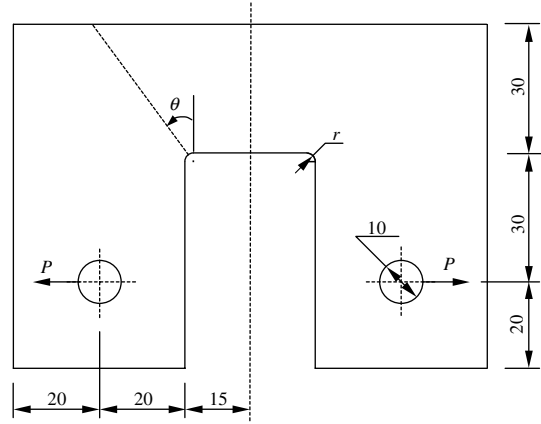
Dimensions (mm) and loading of the channel-section specimen (10 mm thick) and assumed crack path (θ is angle of maximum circumferential stress).
